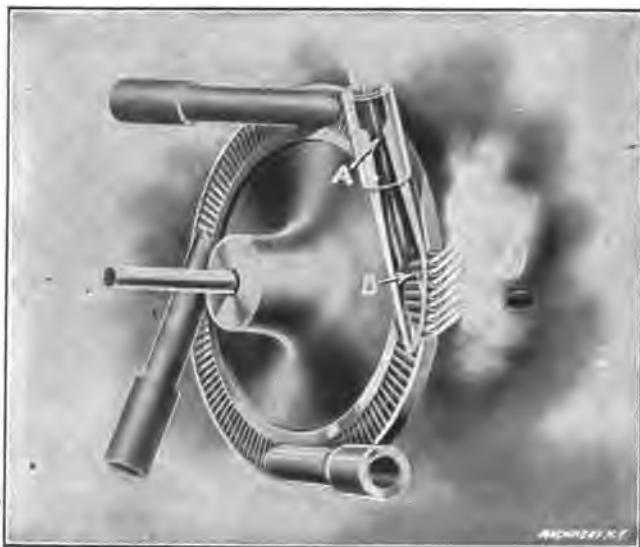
Wheel and Nozzles of the De Laval Steam Turbine
